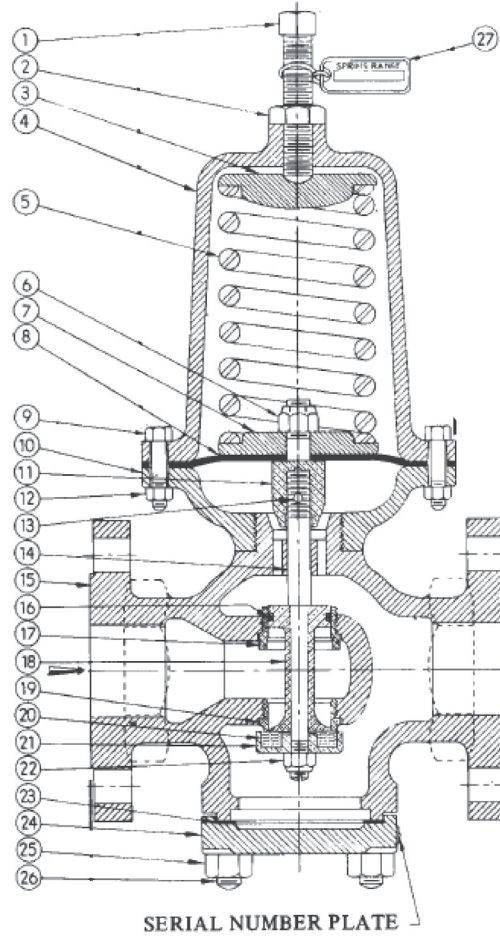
Type D34 Pressure Reducing Valve Assembly Drawing
